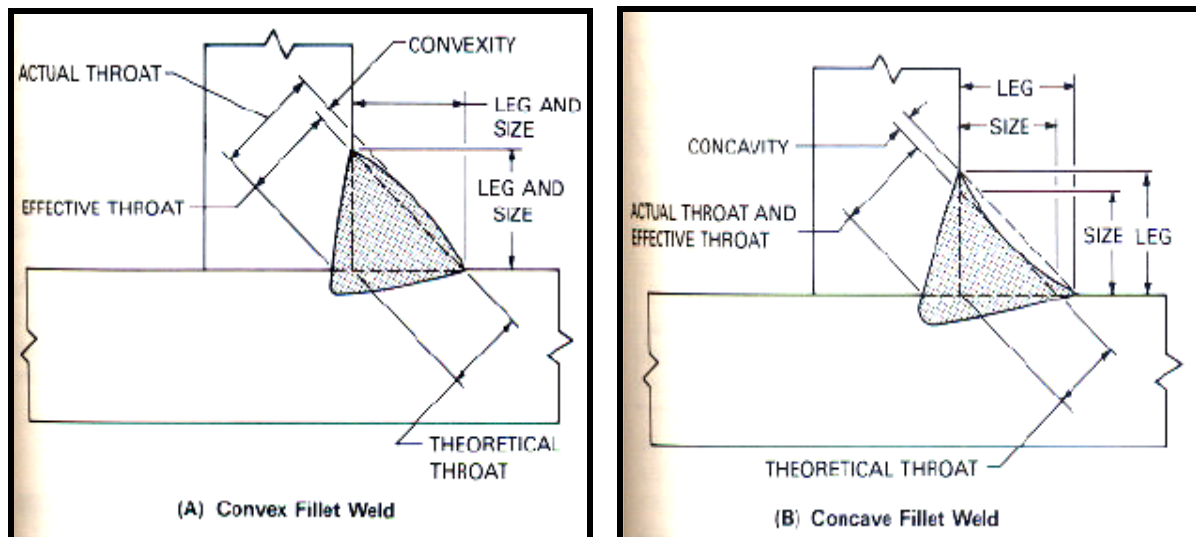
Fillet weld configuration – (A) convex fillet and (B) concave fillet.
